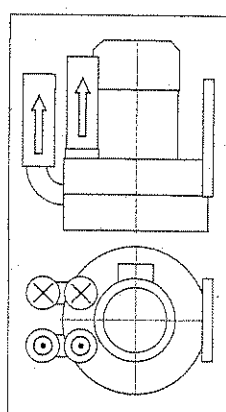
2BH1840-7L... (two-impeller pump-motor unit with double-flow design)
